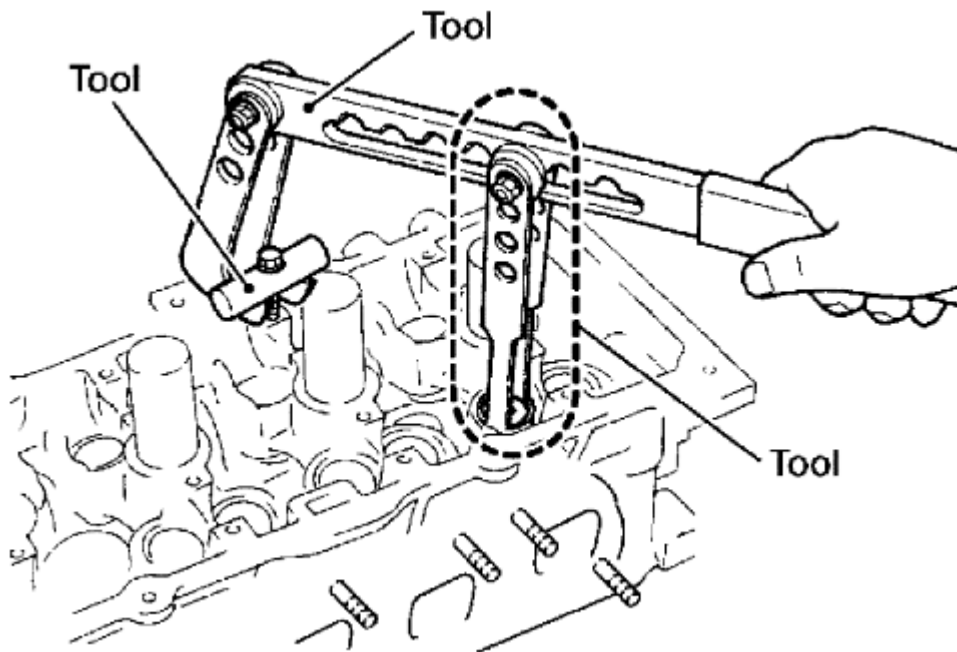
Removing Valve Collet, Valve Spring Retainer And Valve Spring Using Tool
